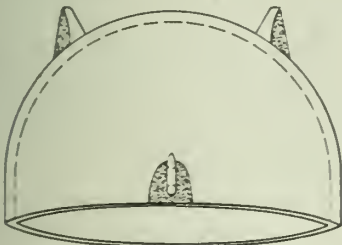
USING BORROWED KETTLE FOR PATTERN.
